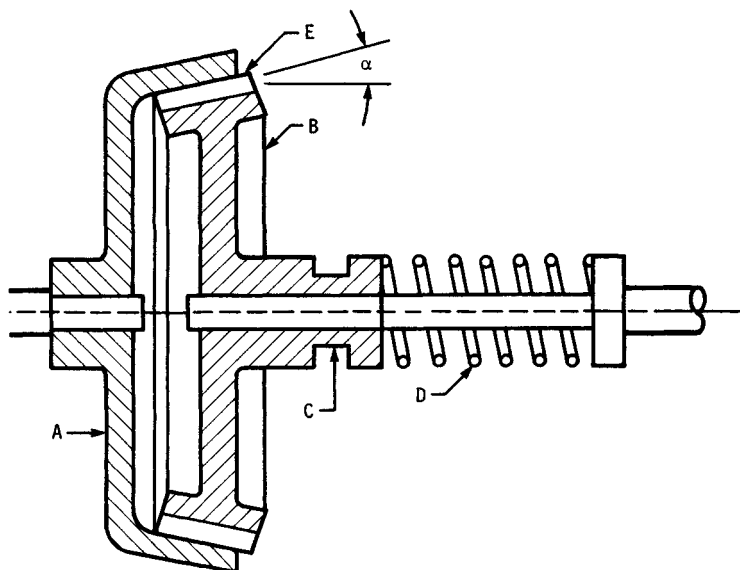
Cone clutch; A, cup; B, cone; C, shifting groove; D, spring; E, friction lining; α = cone angle.
